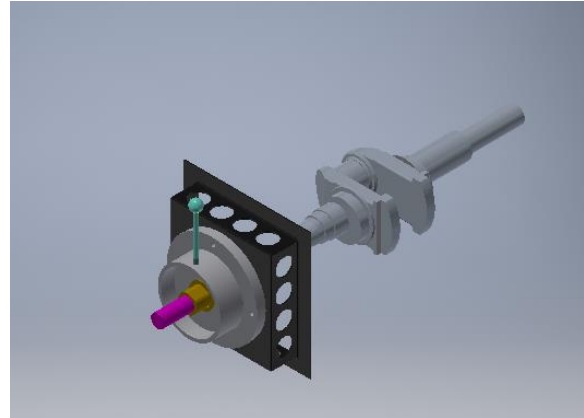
Cam Profile Ignition Coil Assembly Design Drawing
